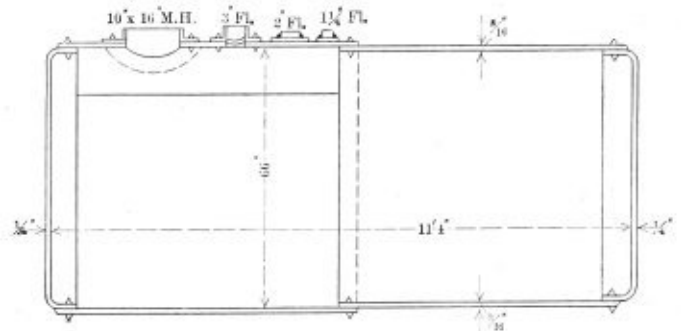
Riveted Tank. Total of 694 3/4-Inch Rivets Driven Cold
